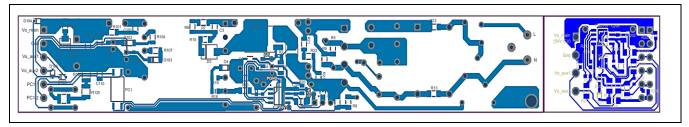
PCB bottom layout of main board and 54 V CV SSR plug-in board
